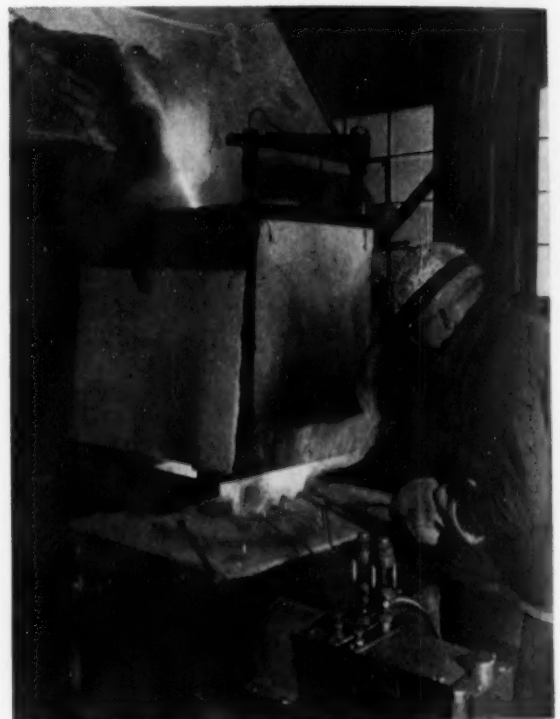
Molten metal from the holding furnace, top left, is fed into the tundish, center. The top of the mold in front of the operator is obscured by the flames of the burning gases which are used to protect the metal bath in the mold from oxidation during the operation.
